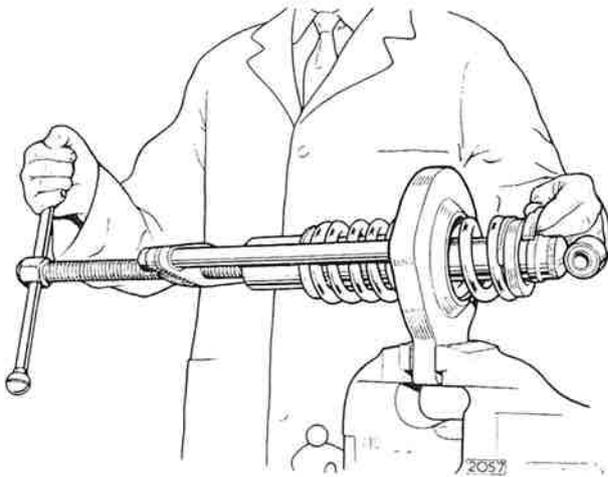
Removing the rear road spring from the hydraulic damper with Churchill tool J.11 in conjunction with SL.14
